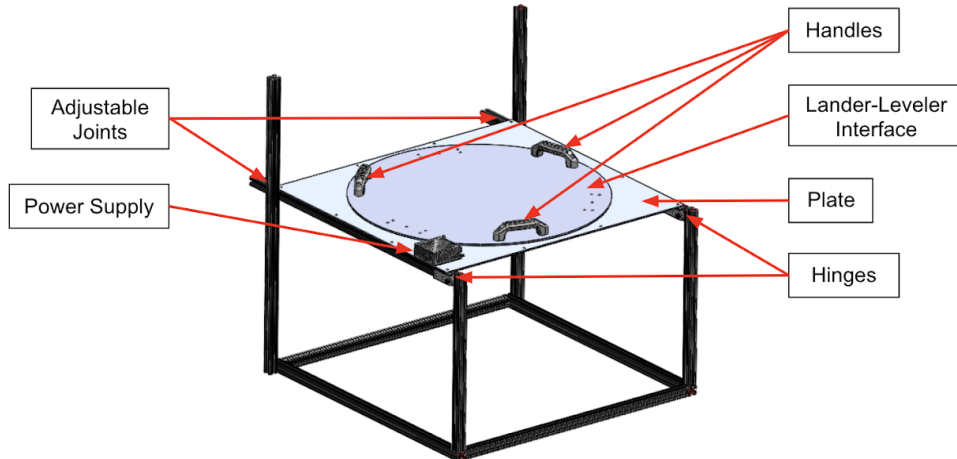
CAD of the MELLTT mock lunar lander with callouts identifying components.
